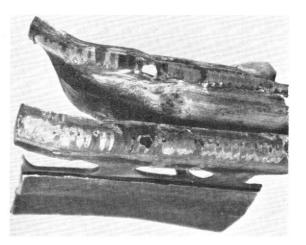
Peeling test: unsatisfactory seam weld showing poor adhesion.
